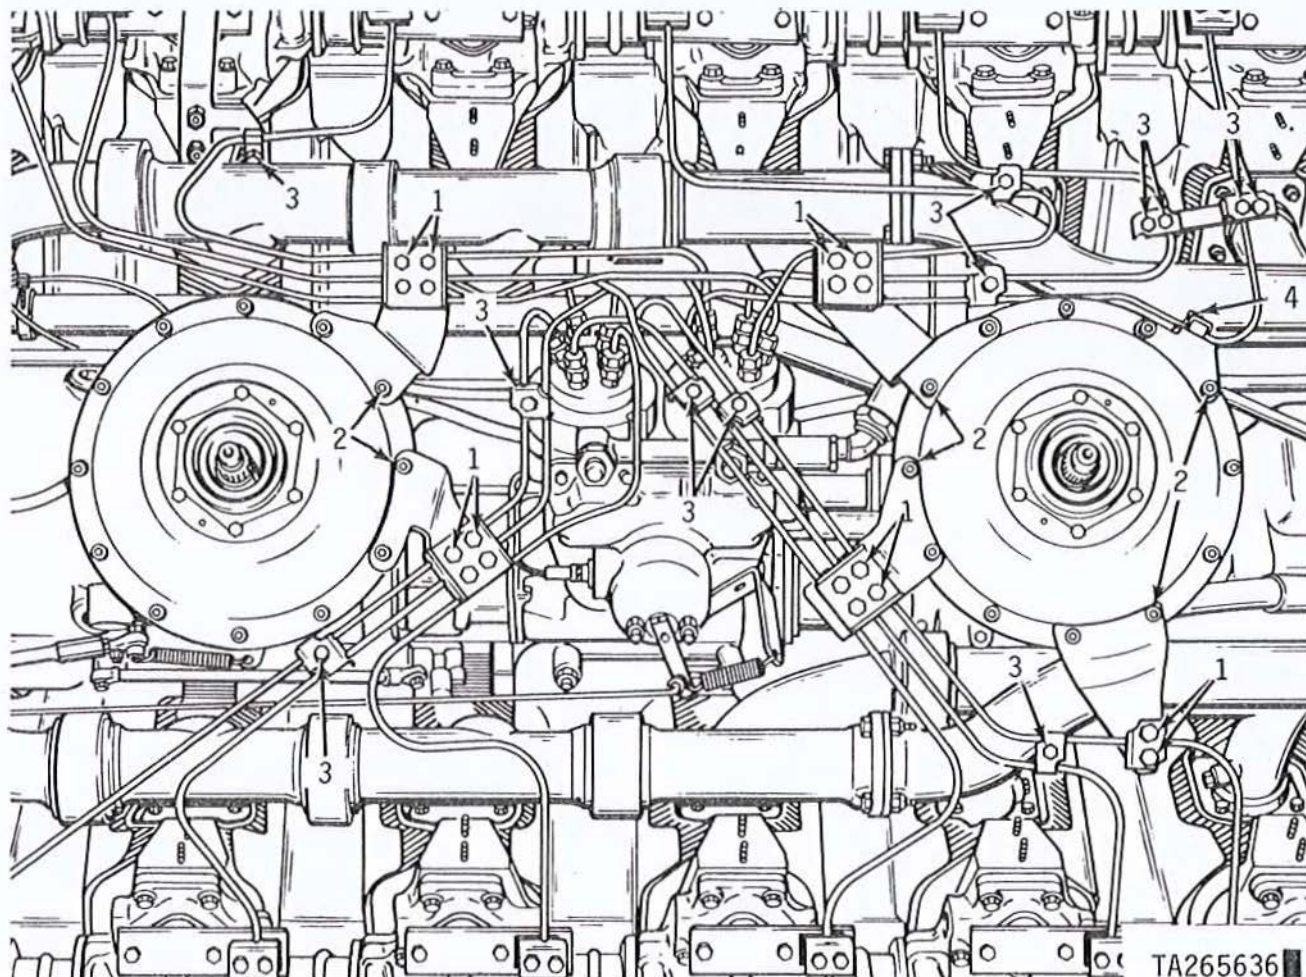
Removing or installing fuel injector left and right bank tube clamps from clamp supports.
